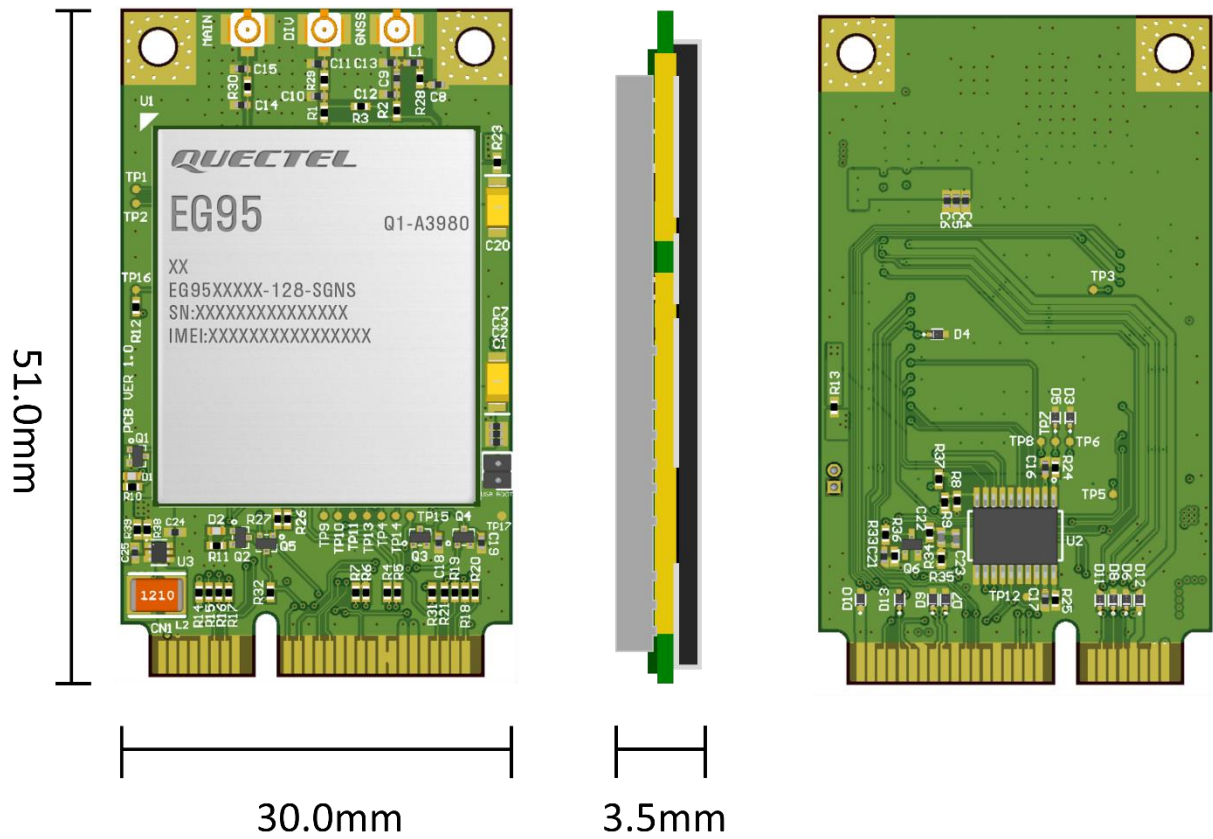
miniPCle EG95 LTE Cat 4 module physical dimension.
